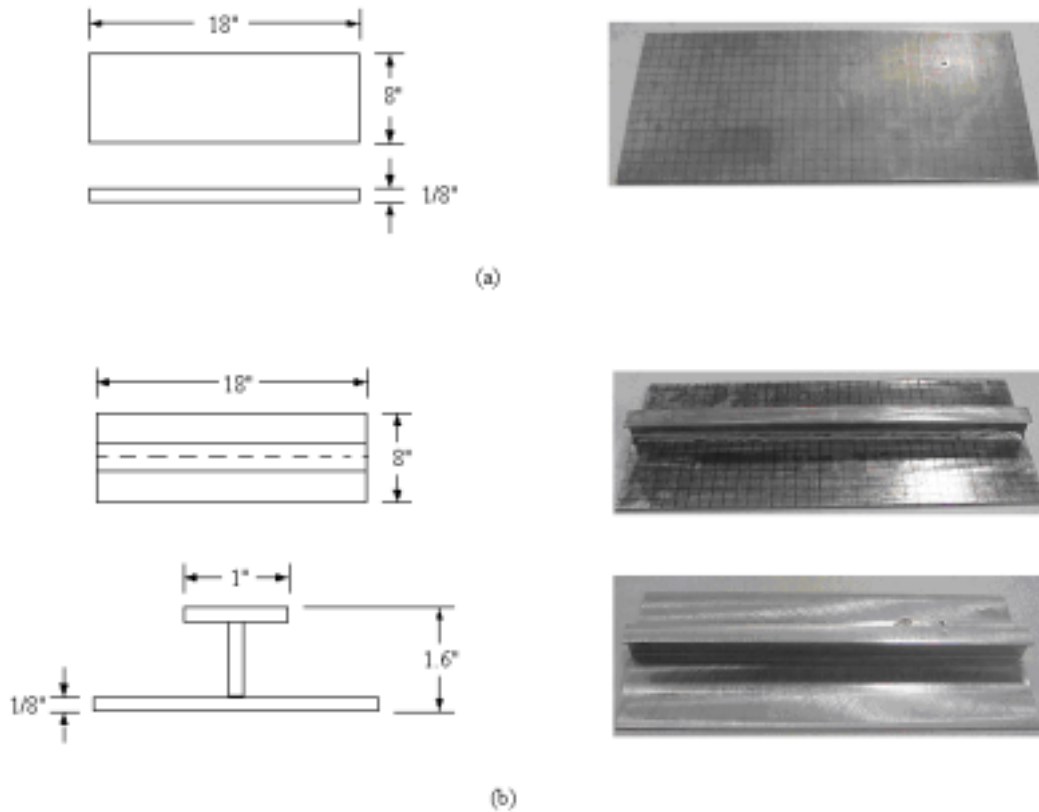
18-inch test specimens (a) flat plate (b) upper right welded plate, lower right machined plate
